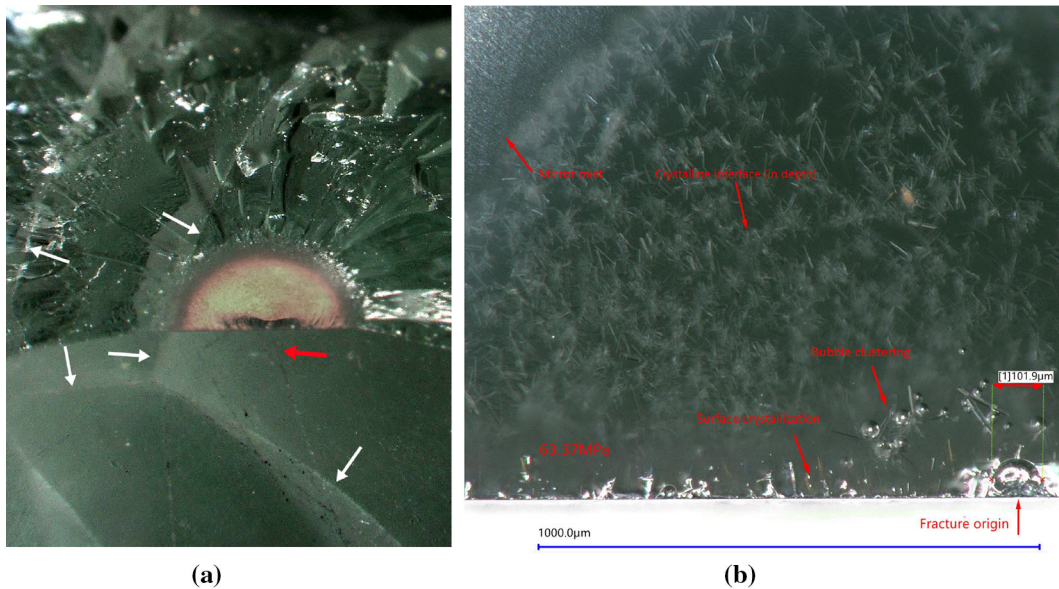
Fracture surface of the “Wertheim 900 °C” specimen. a Microscope image showing the bottom surface and fracture mirror. The specimen failed from a grinding scratch (red arrow) next to the fusion interface (white arrows). b Close-up of the mir-
